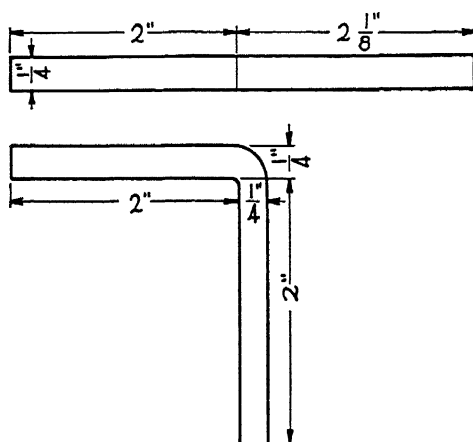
Layout for bending a 2-in. corner brace from  $\frac{1}{4}$ -in. metal
